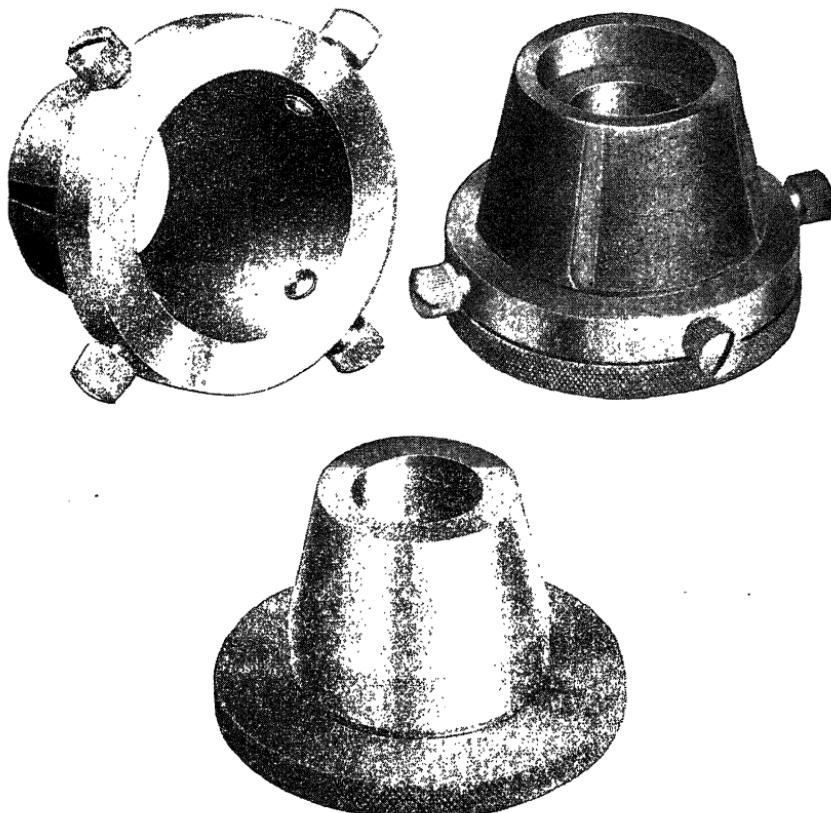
Tapered Bushings Used for Aligning Reamer Bar
